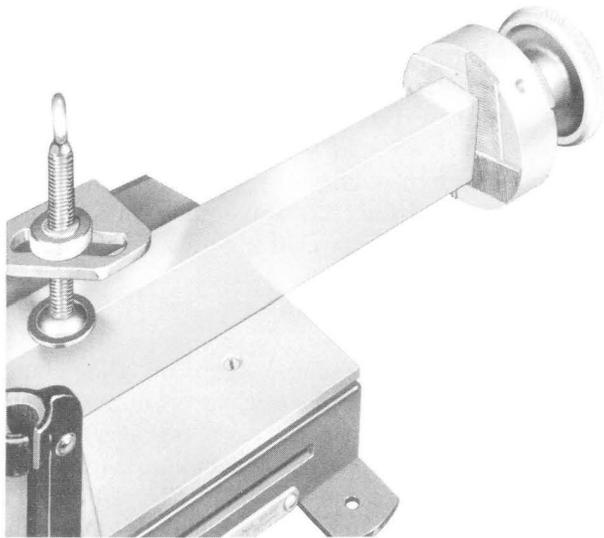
Rotary File Assembly Inserted in Waveguide End
